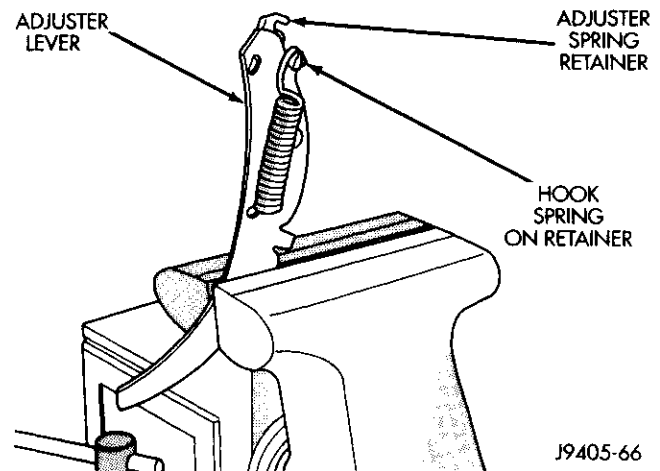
Assembling Adjuster Lever, Spring And Retainer
